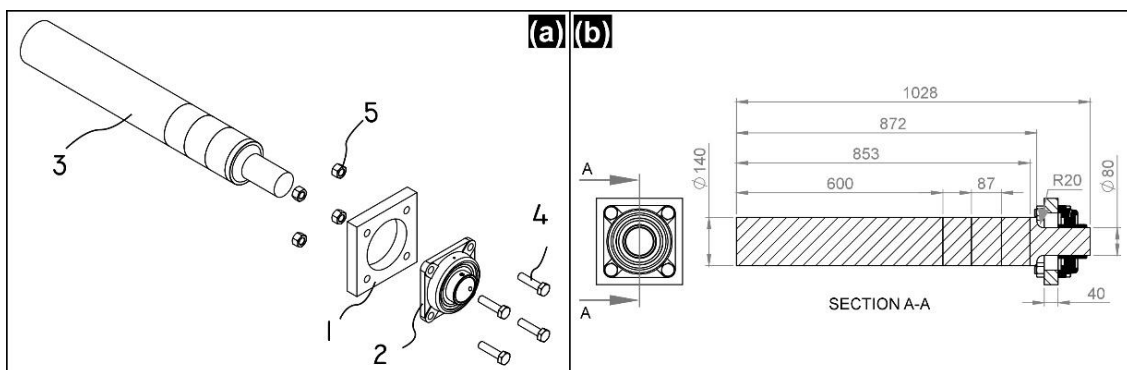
(a) Exploded 3D view of UCF and main shaft, (b) 2D technical drawing of the system.
